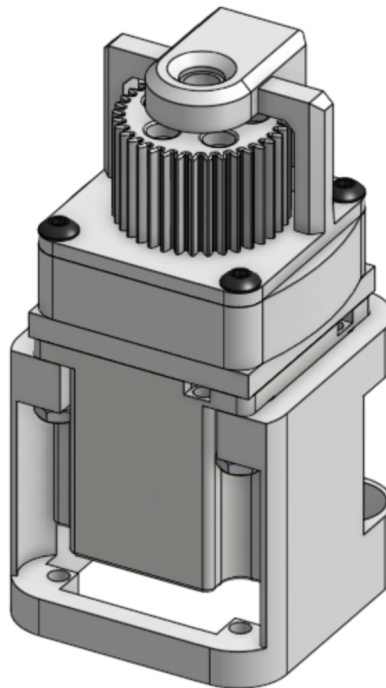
Four #10-32 bolts and nuts securing the gearbox cover stack.
